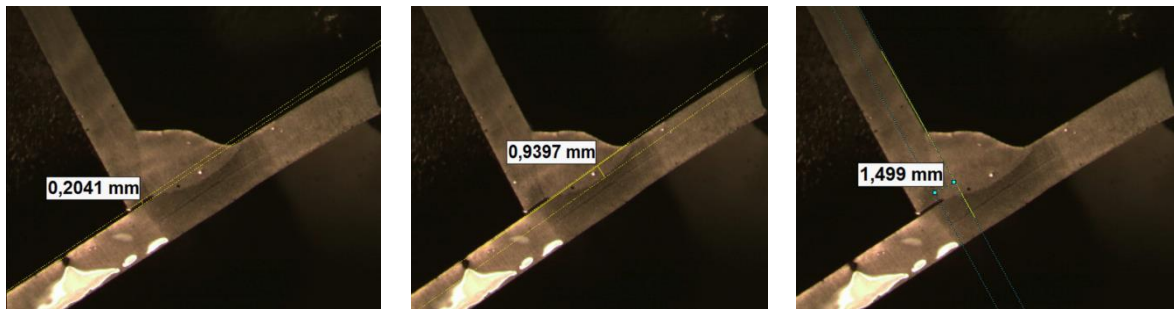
Example of macro sections of the welded specimen to examine the weld gap and penetration depths for both plates
